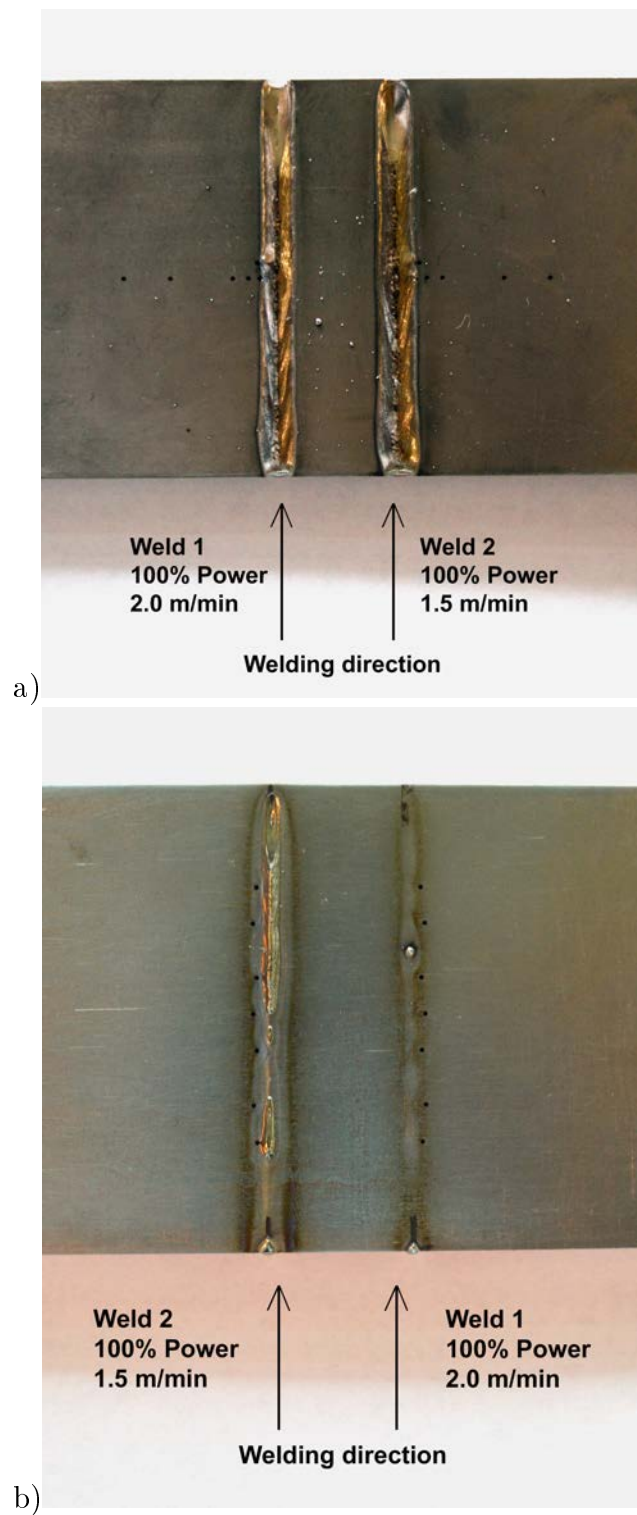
Cropped photographs of the Ti-6Al-4V plate 5 mm thick, with equiaxed microstructure, after welding tests - detail of the welding area. In this case 100% power was used at two different speeds, 2 m/min and 1.5 m/min. a) Top view. b) Bottom view
